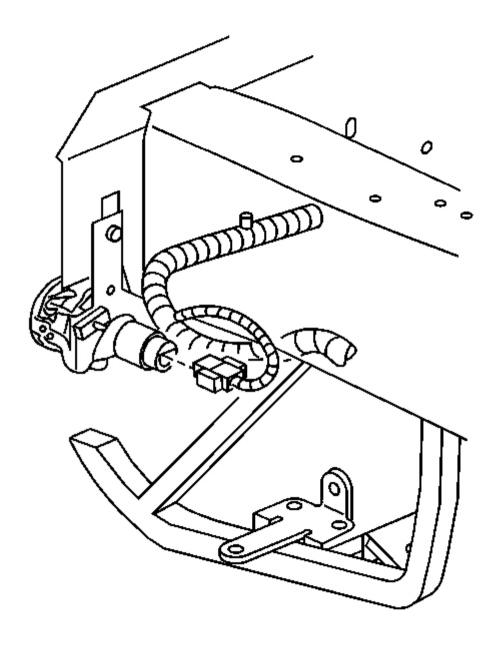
Front Fog Lamp Electrical Connector To Fog Lamp Bulb/Socket Courtesy of GENERAL MOTORS CORP.
